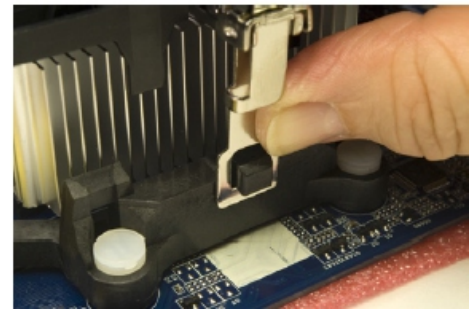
Press the black plastic cam lever on the CPU cooler down until it latches to secure the CPU cooler to the processor socket
